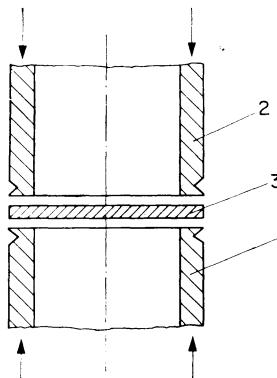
A method for the welding of thin windows to heavy frames: (1, 2) stainless steel; (3) aluminium foil. After Shon¹¹³⁴ (*Courtesy of The American Institute of Physics*)
